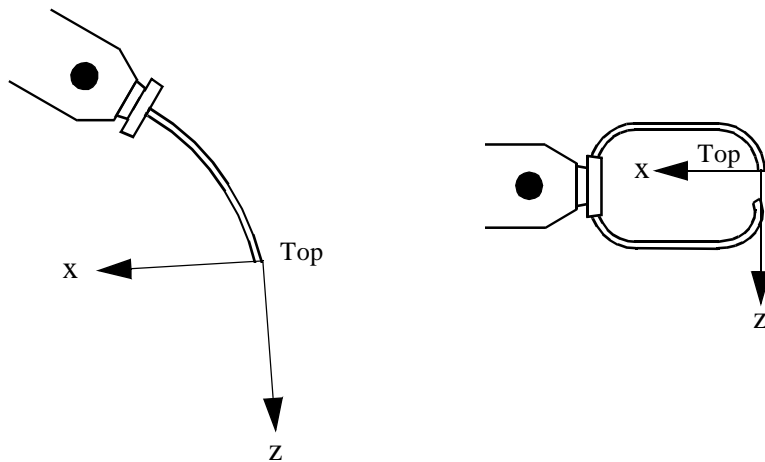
Tool coordinate system, as usually defined for an arc-welding gun (left) and a spot welding gun (right).
